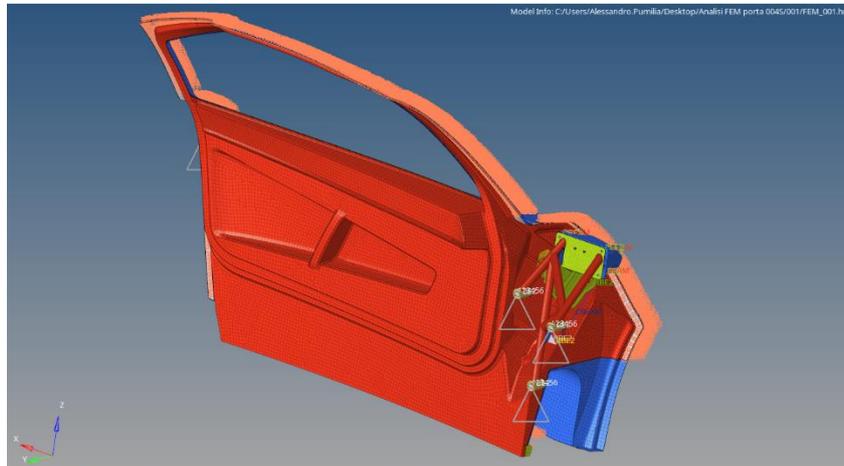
Baseline door assembly with tubular chassis attached to the frame (001)
